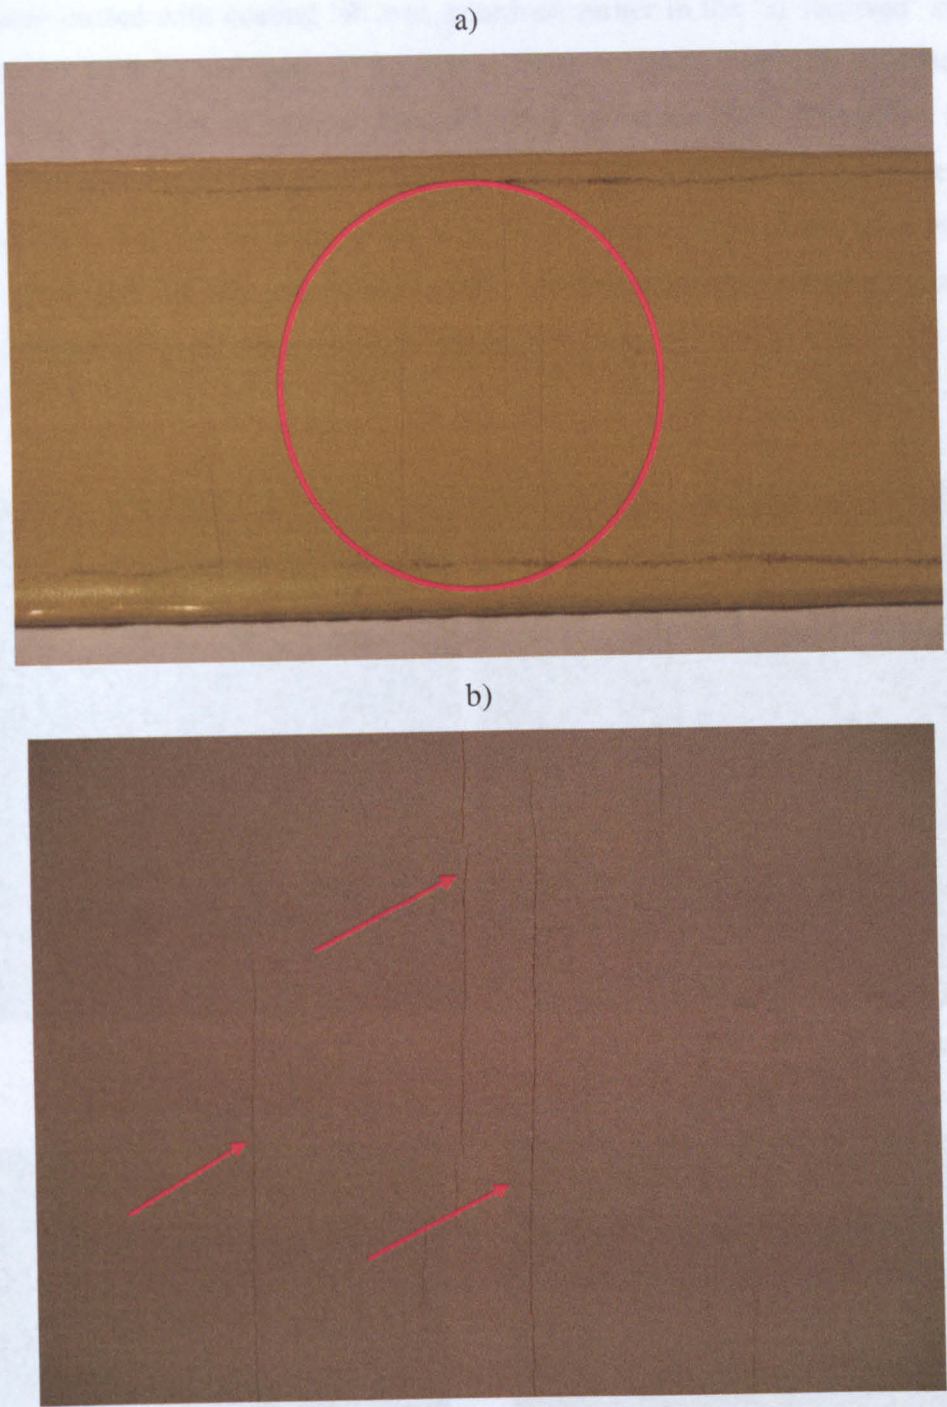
Panel B4 tested in air after 400,000 cycles; a, b) optical images, showing multiple fatigue cracks. Note in a) the hand finished edge to the coating
